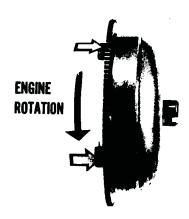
Torque converter shell is bolted directly to the engine, turns at engine speed.
